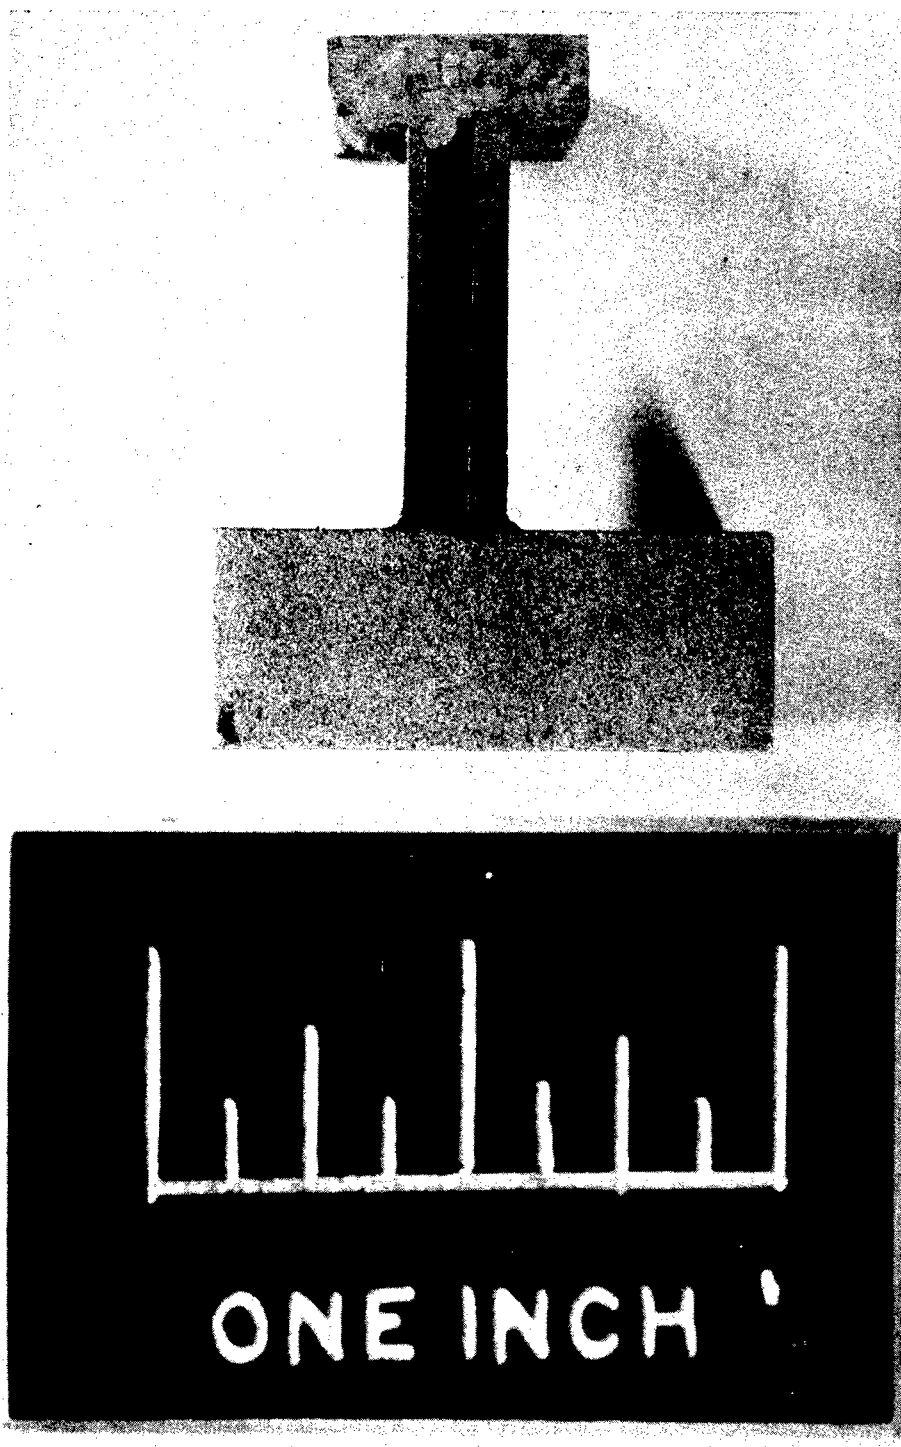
Cross Section of Tip-Cap Weld.
